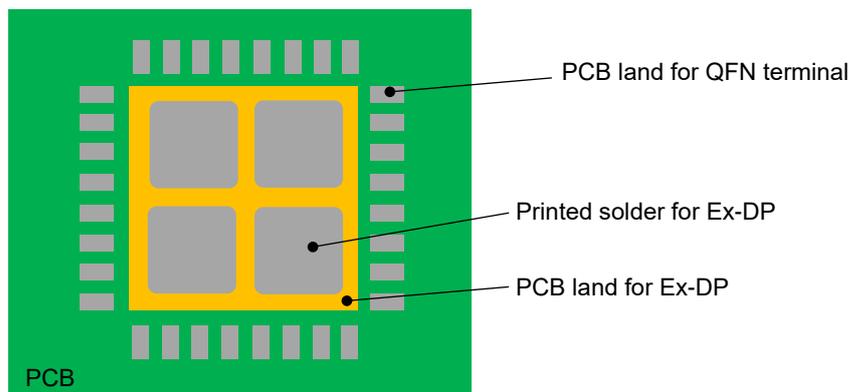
(Reference) Solder Printing for QFN PCB
